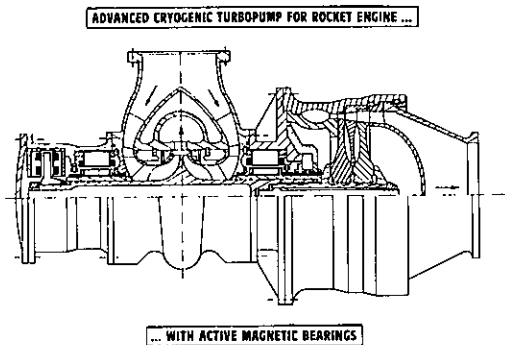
Cross section of a rocket engine turbopump on AMB (Courtesy of SEP)
